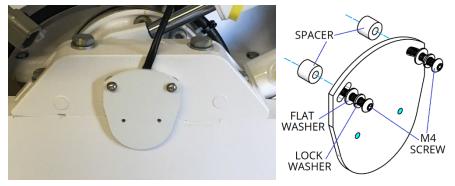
Seakeeper 2/3 details shown. Other models similar but may have differing hardware and sizes.
